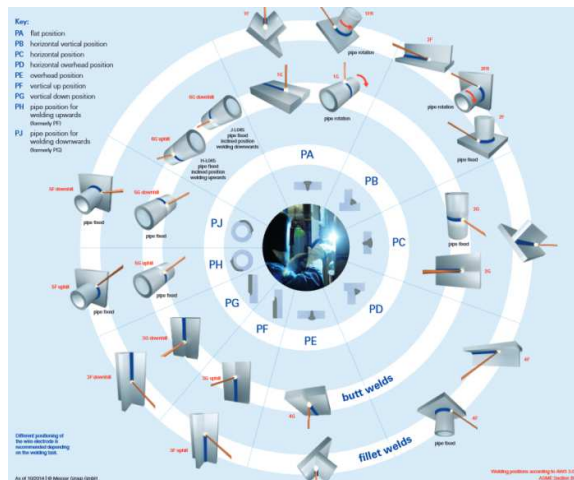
Welding positions (MESSER) according to ISO 6947:2019 Welding and allied processes — welding positions.
